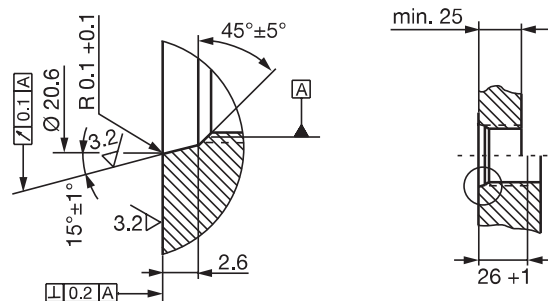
Mounting hole 3/4"-16UNF per SAE J475 O-ring 15.3x2.4
